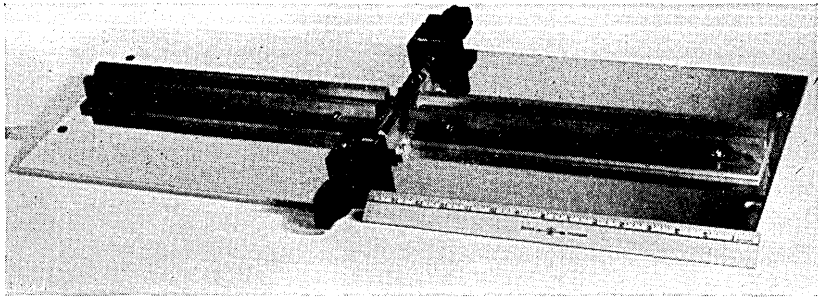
Pneumatic transport, component feeder, and retractable component-forming block in the center
